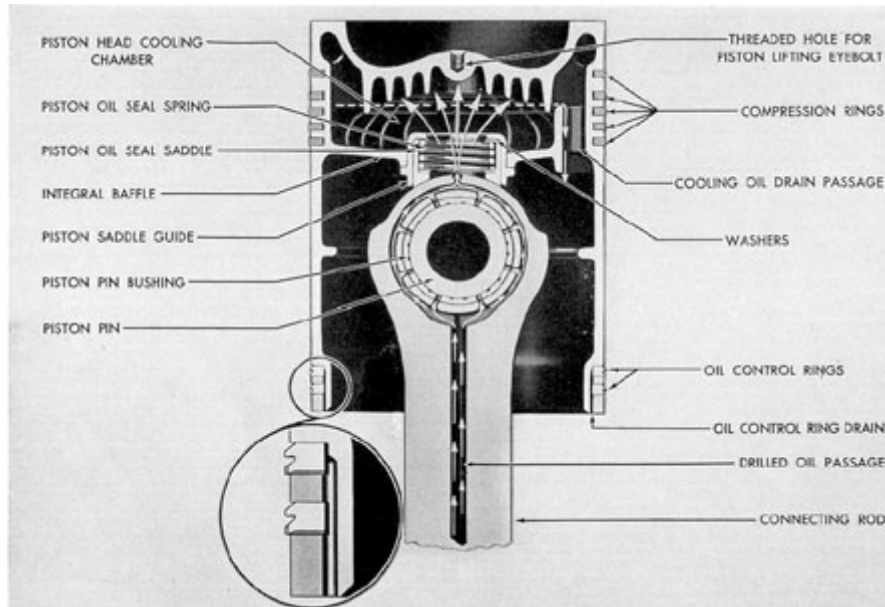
Cross section of piston showing cooling and lubrication, GM.
